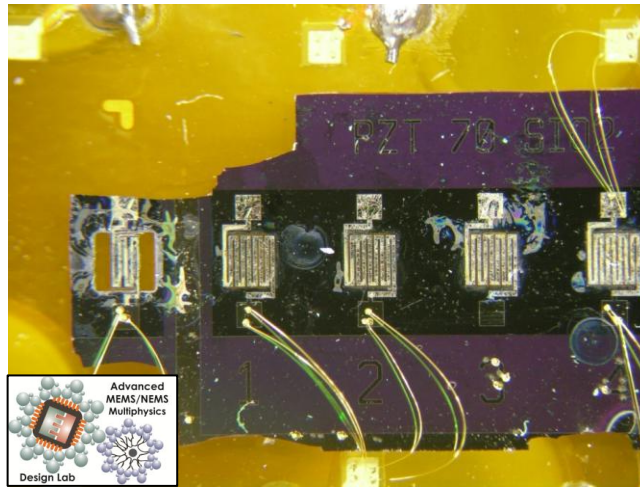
Fully packaged Class I Harvesters on Flexible Printed Circuit Board (FPCB)
